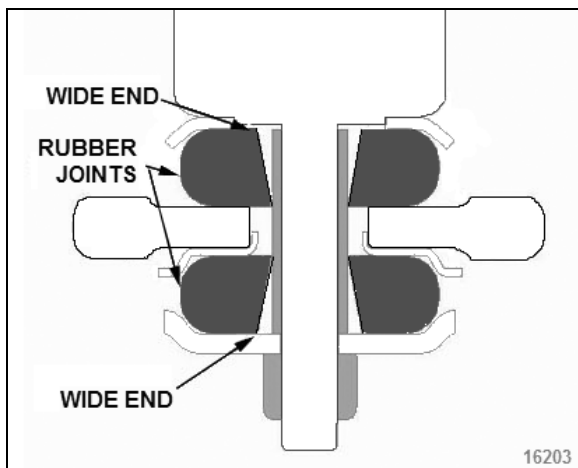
LOWER SHOCK MOUNTING BUSHINGS
